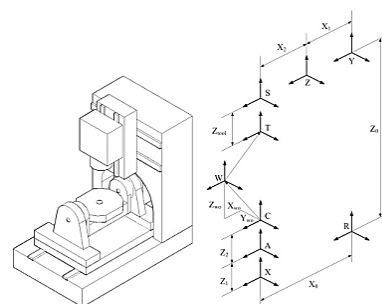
Coordinate Systems of a Five-axis Milling Machine [12]
